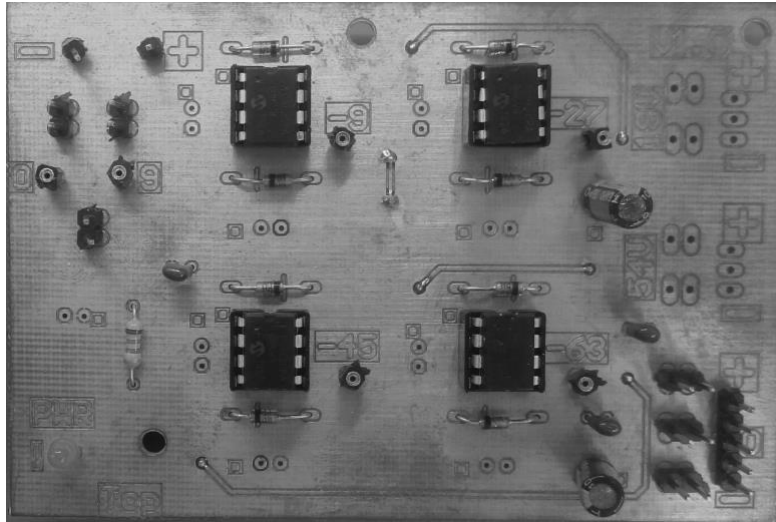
Photo of the HVPSU prototype PCB. Limited surface mount components are on the underside of the PCB.
